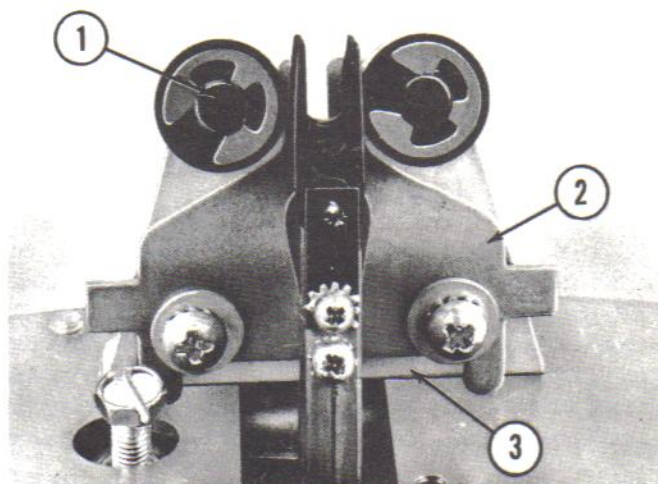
BRACKET AND ROLLER GUIDE ASSEMBLY, LIFT ARM GUIDE, 2500
